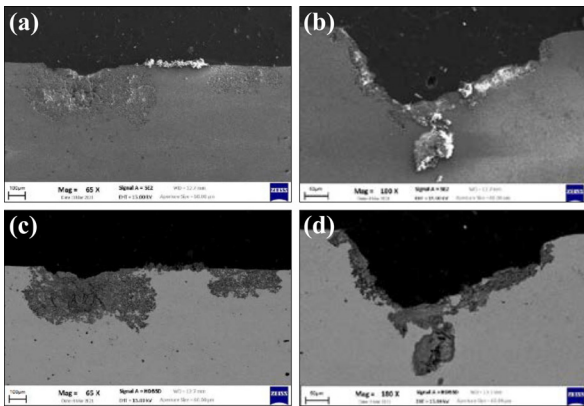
(a) the inner surface of part B-2 initial area and (b) pits form the cracking seam.
